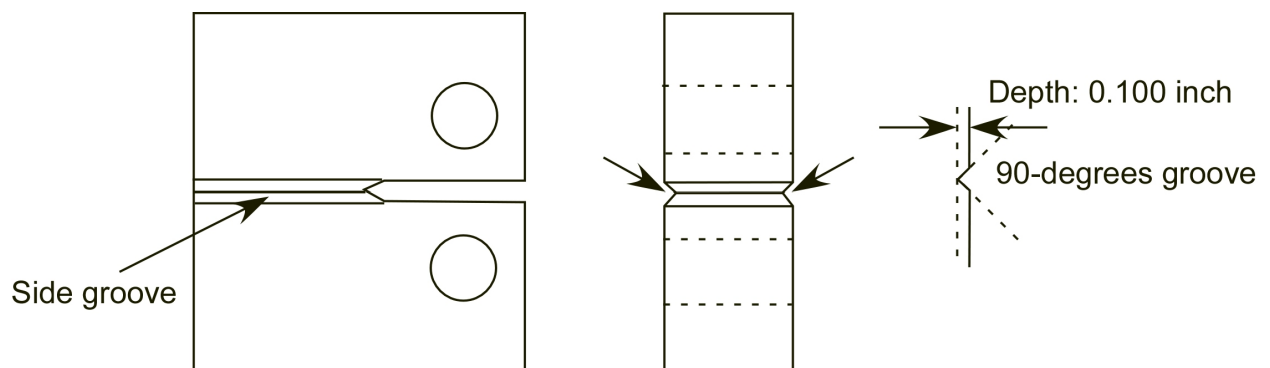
Drawing showing orientation of side grooves in CT-specimen.
